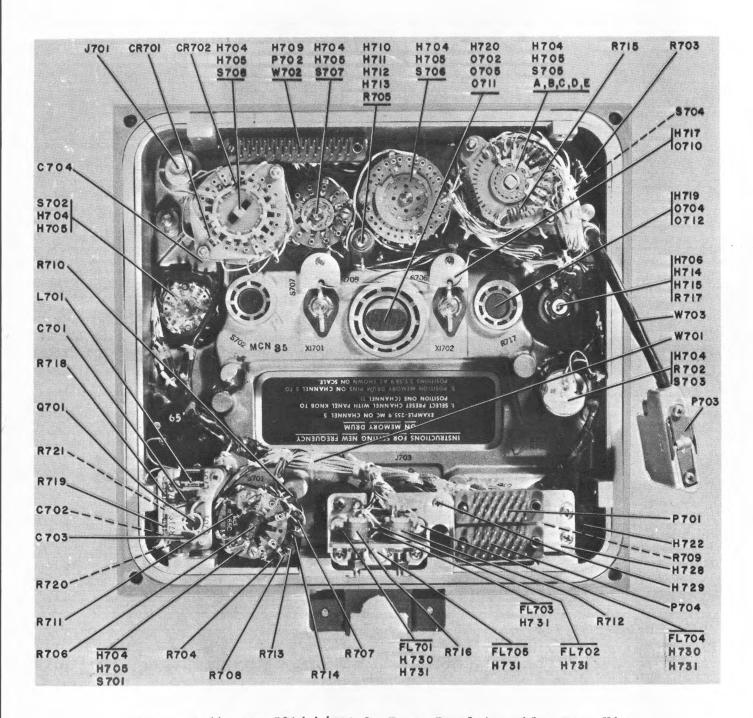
RT-581()/URC-9, Front Panel Assembly, Rear View
